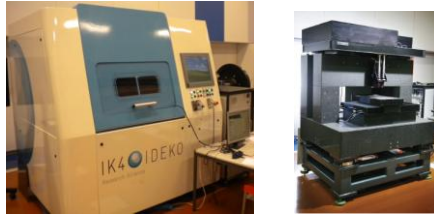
Overall view of IK-Laser machine, internal structure and stages
